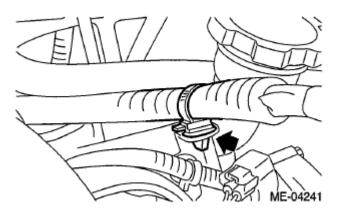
Locating Intake Manifold Protector LH Courtesy of SUBARU OF AMERICA, INC.
